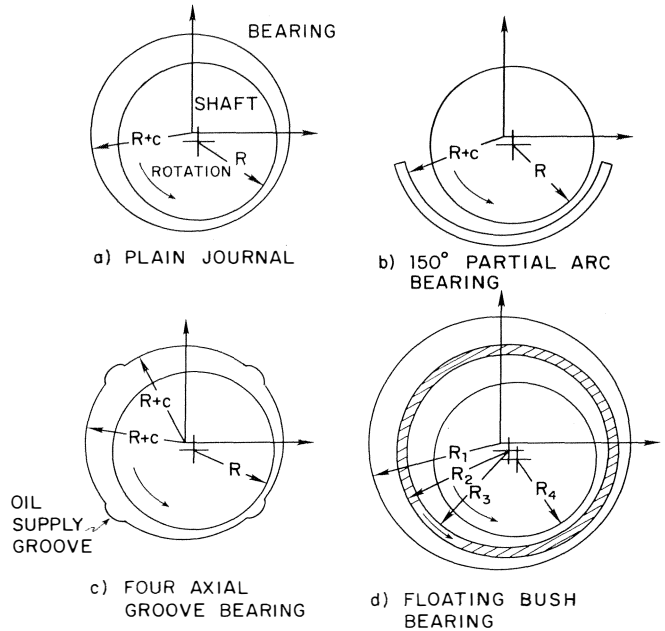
Types of Fixed Pad Non-preloaded Journal Bearings.
